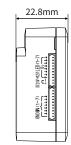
Dimensions - Front View Figure 3. Dimensions - Side View
